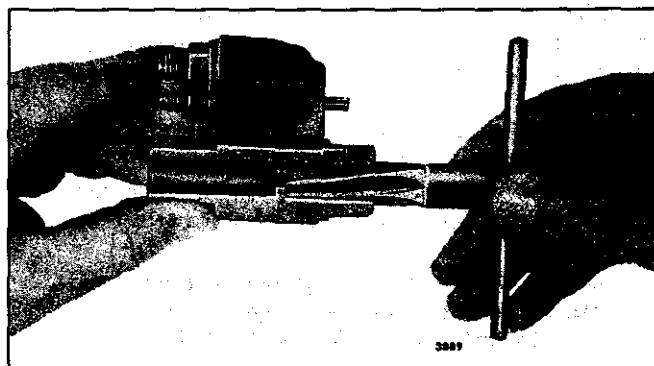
Cleaning Injector Body Ring with Tool J 21089
